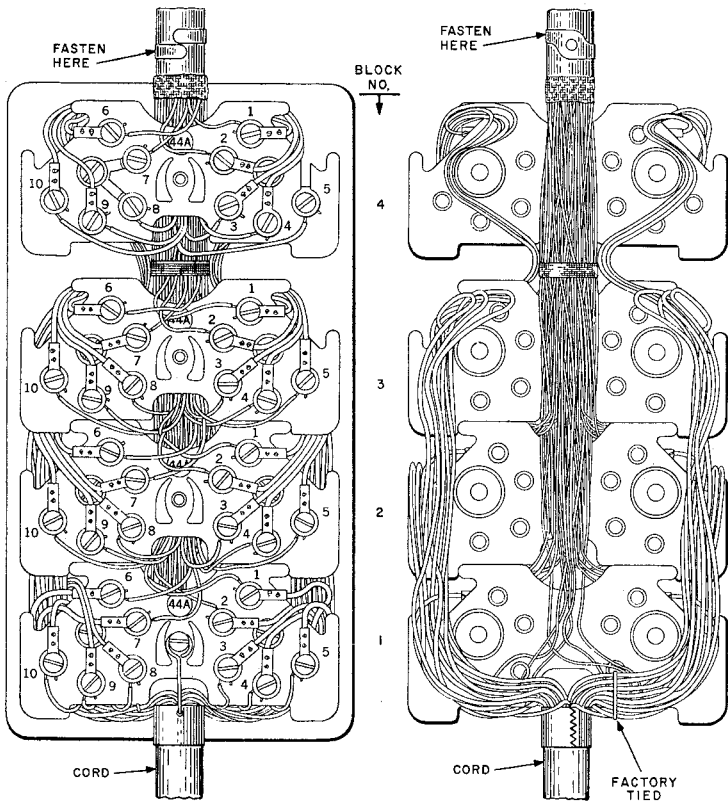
Arrangement of Four 44A Connecting Blocks Used with 500 Series Key Telephone Sets Equipped with Vinyl-Jacketed Mounting Cord
